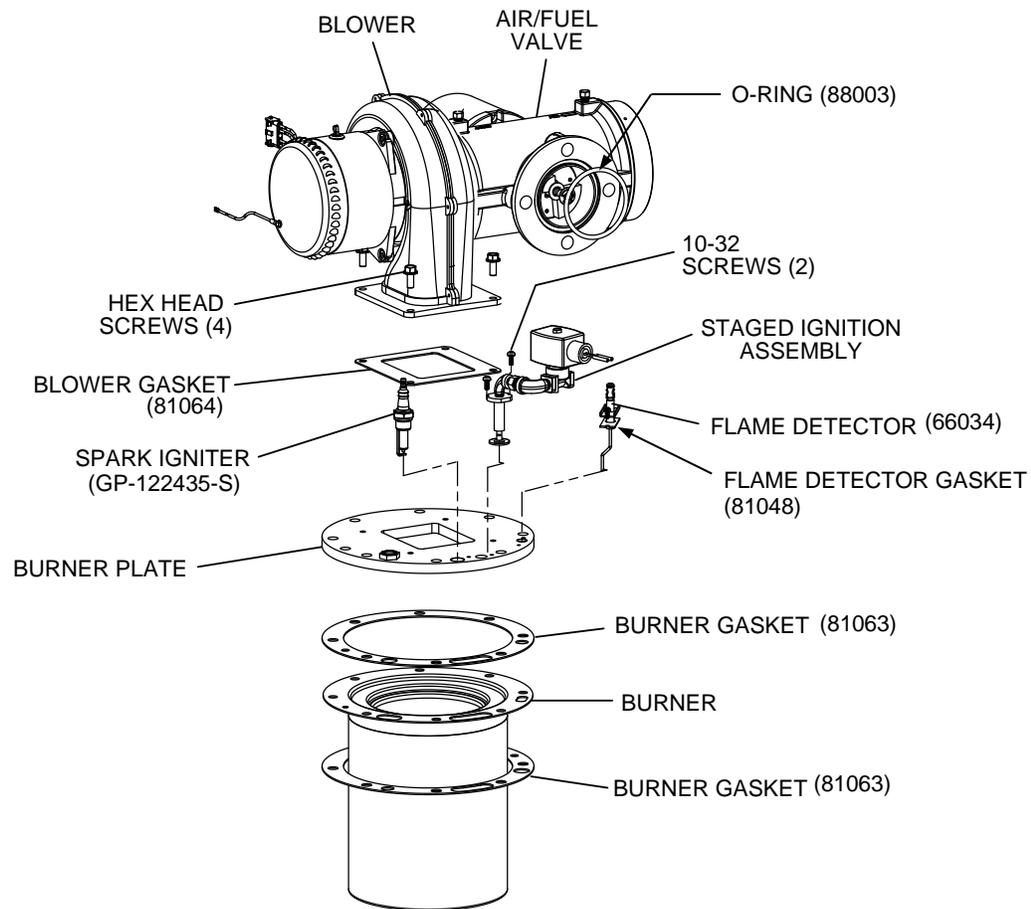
Benchmark 1.5LN Burner Assembly Exploded View
